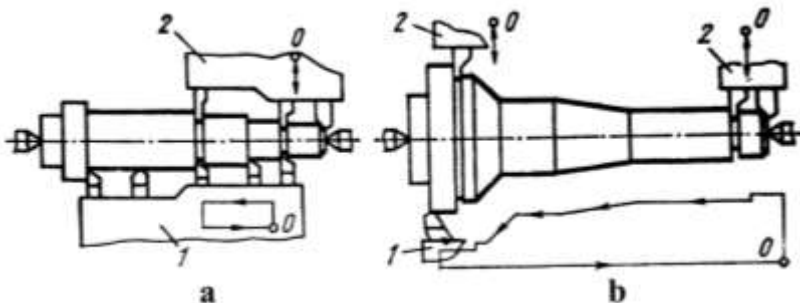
Machining of step shafts in multiple-tool (a) and profile-turning (b) semi-automatic lathes
